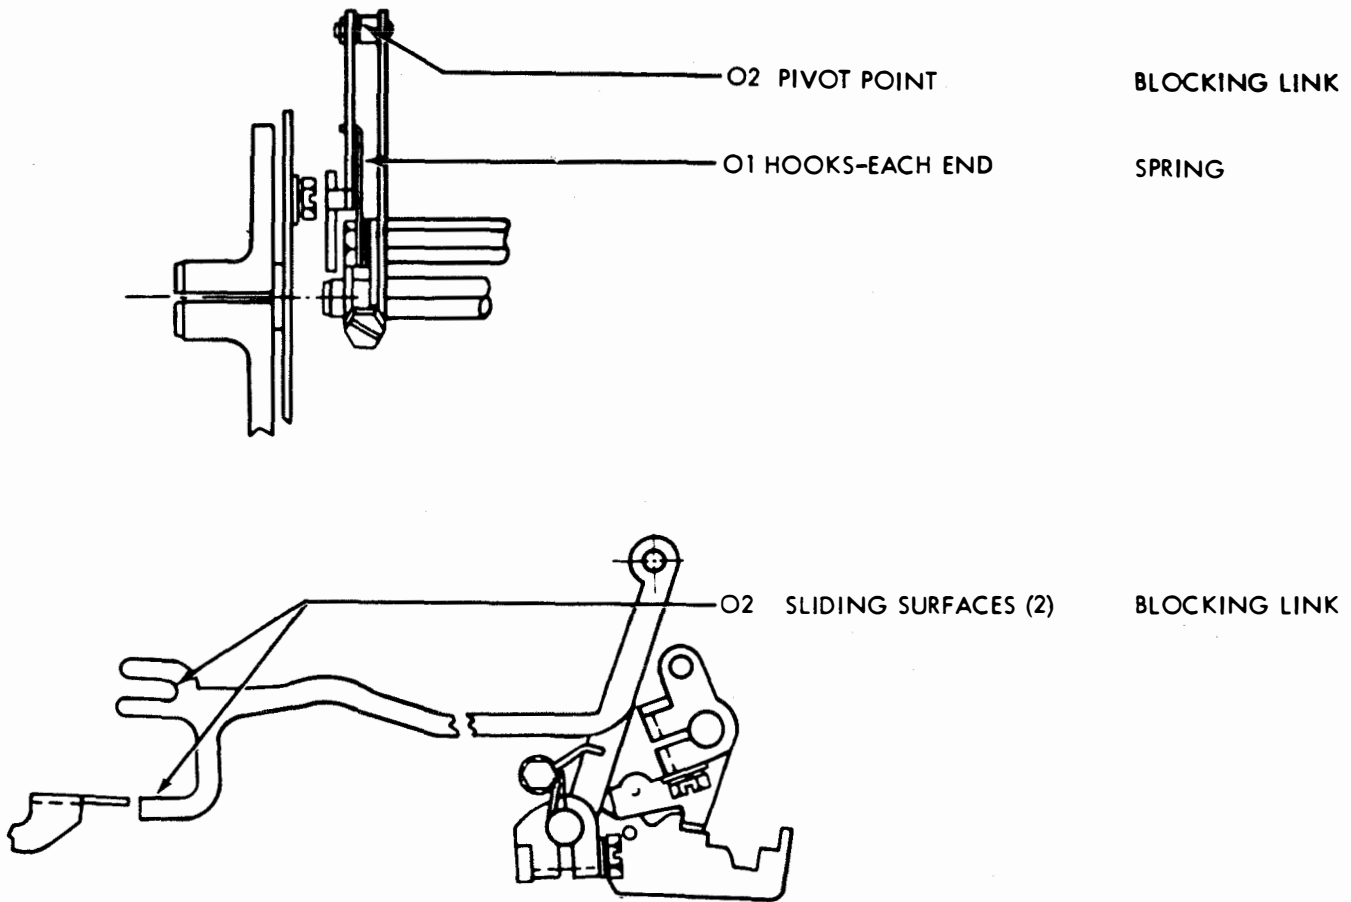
Automatic and Remote Control Noninterfering BLANK Tape Feed-Out Mechanisms
